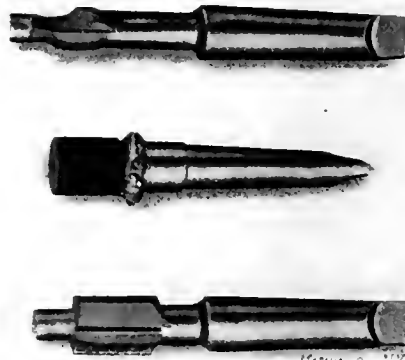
Broken Counterbore Repaired by Electric Welding
